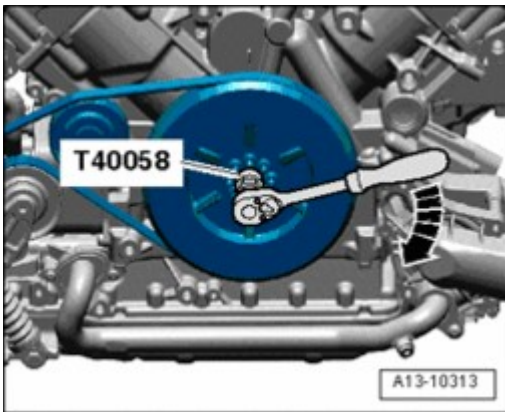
Using Socket T40058 To Rotate Crankshaft To TDC
